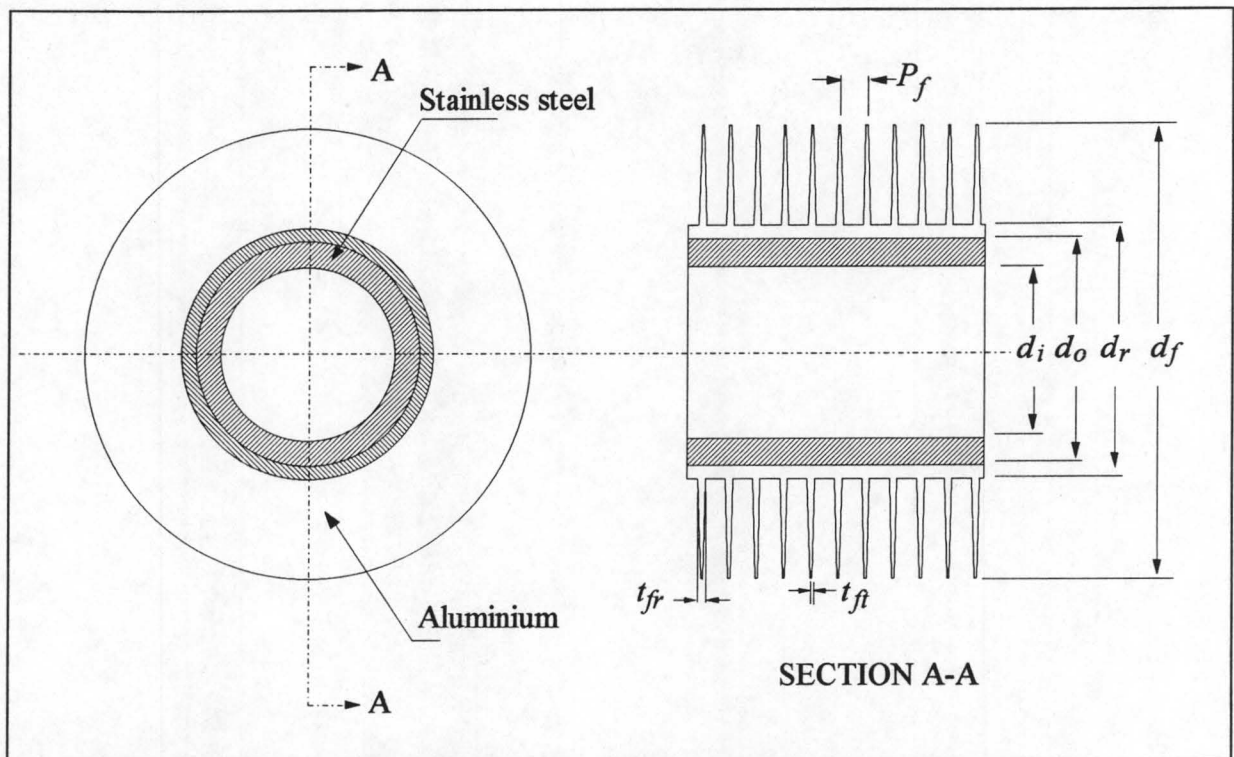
Schematic layout of the extruded bi-metallic finned tube.
